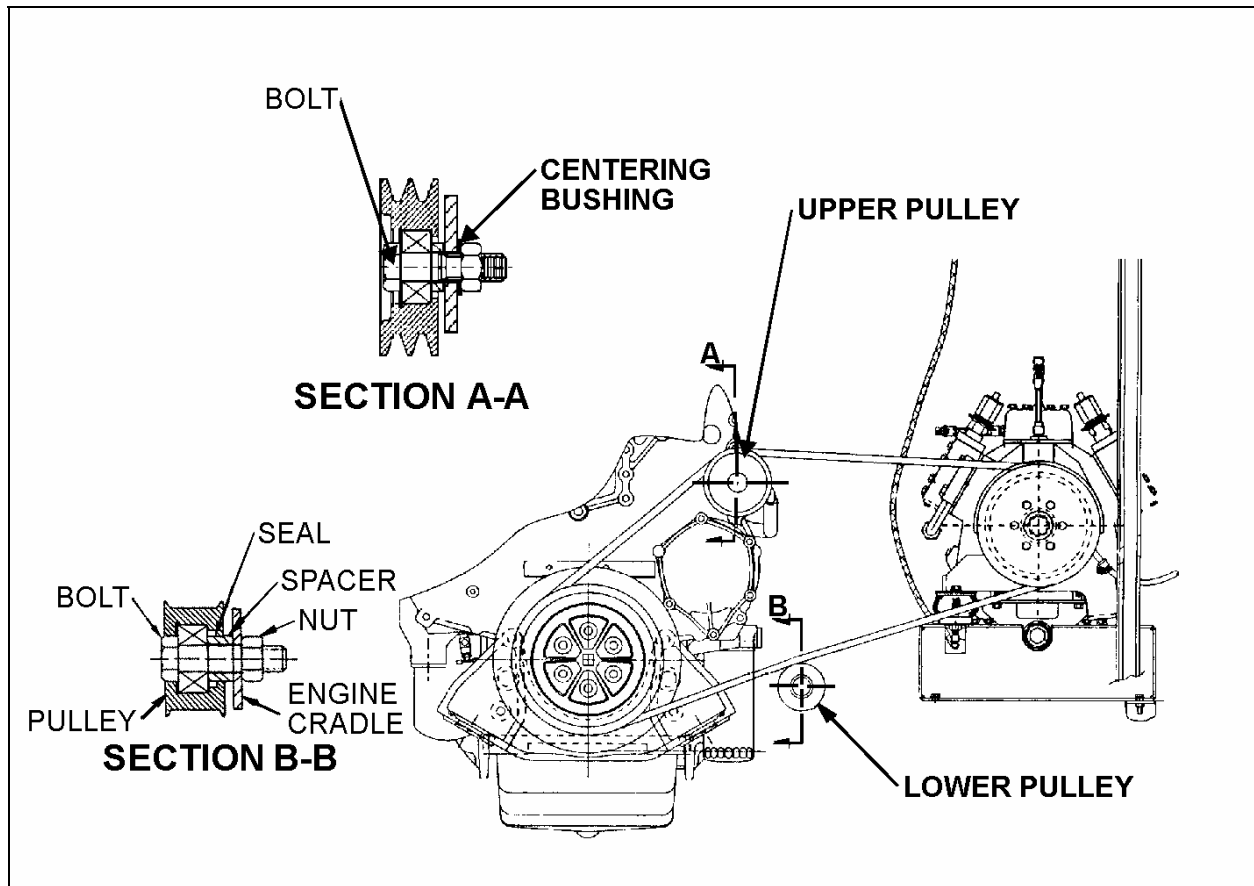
A/C COMPRESSOR DRIVE INSTALLATION
